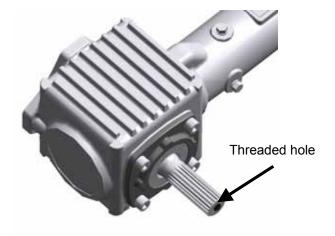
Gearbox MD#45968 OR 111958 with threaded hole
